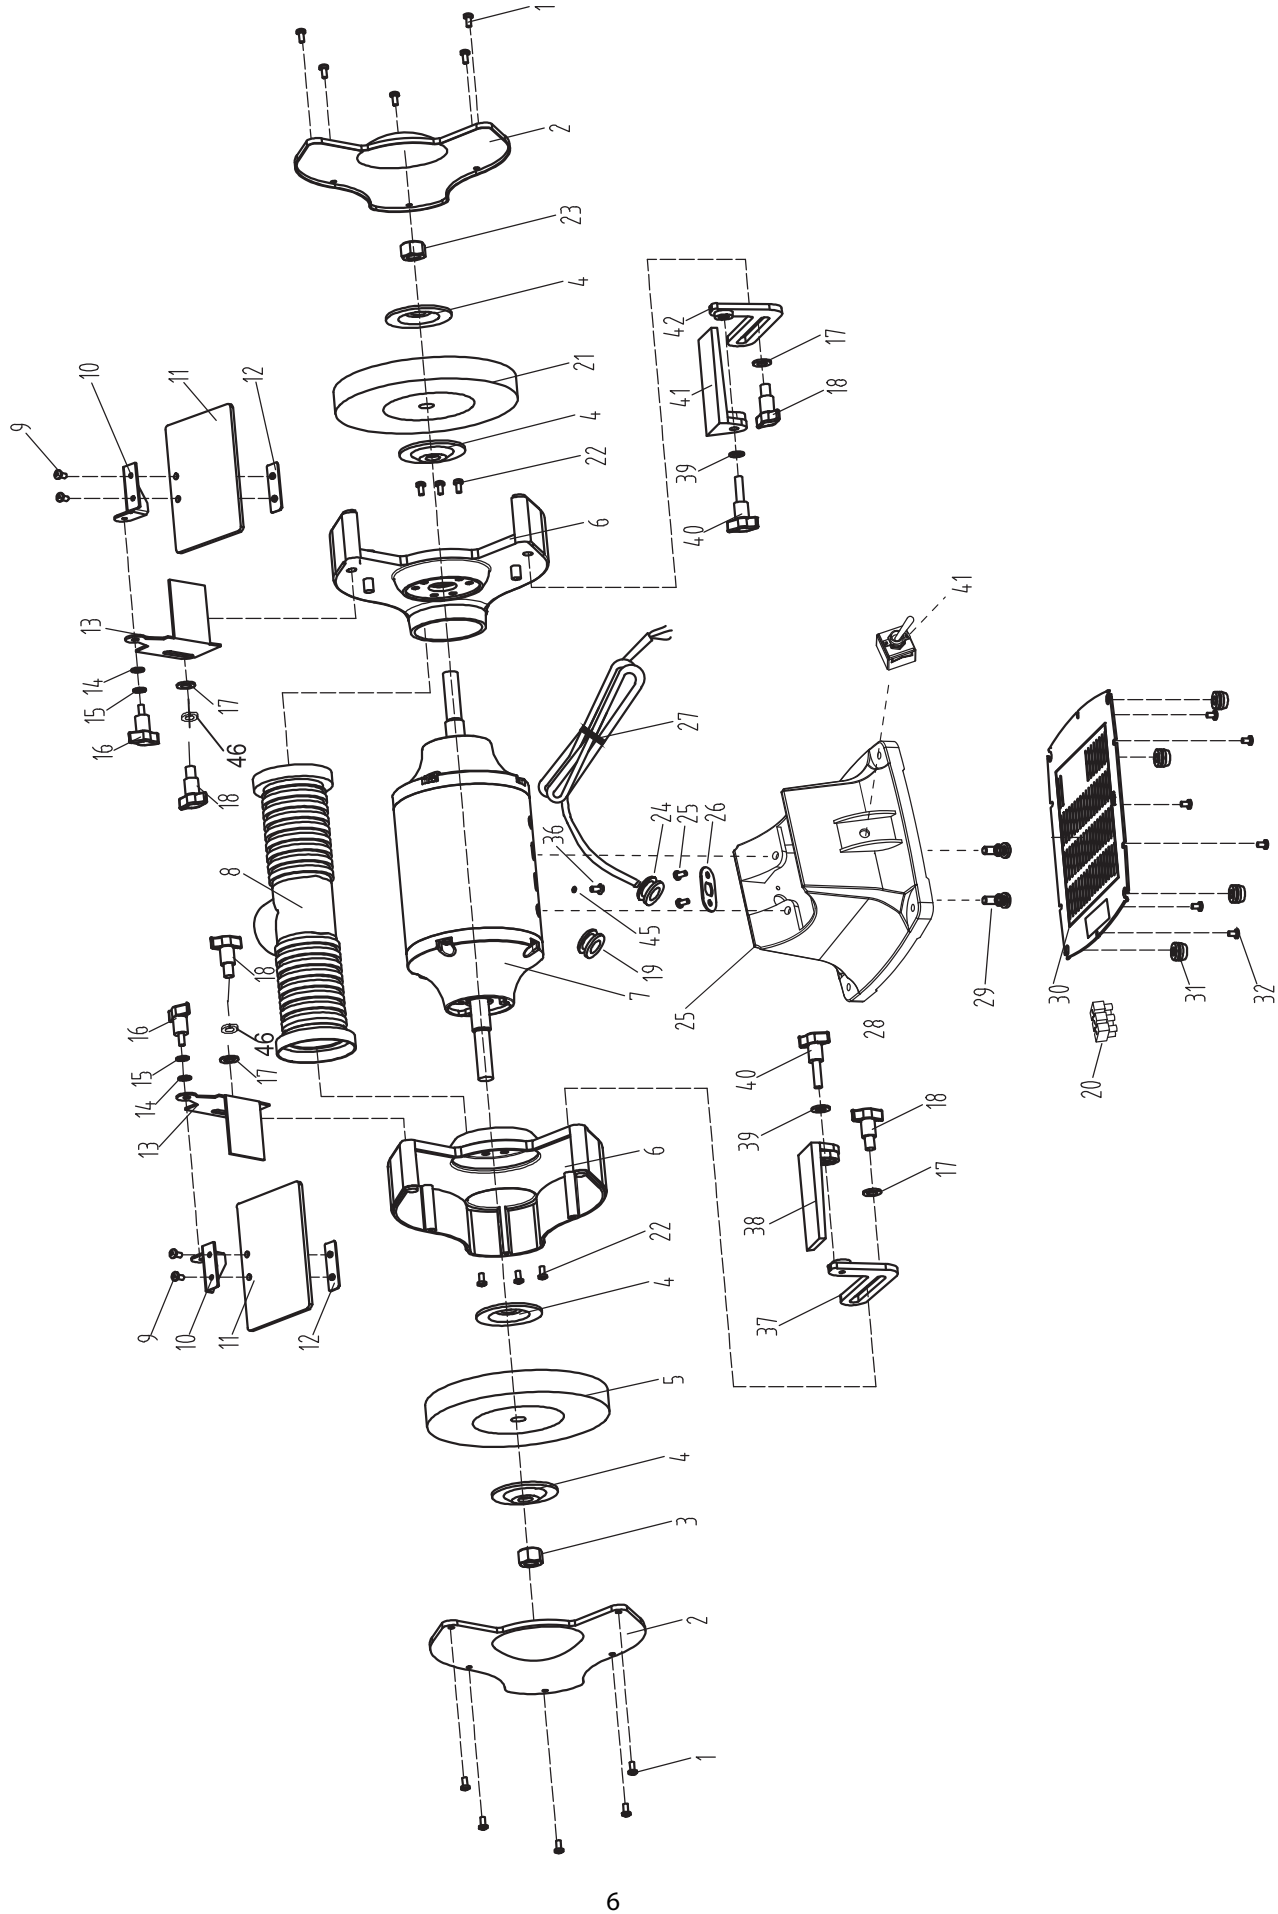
Repair Parts Illustration for 9682081D, 8" Bench Grinder, 3 Phase
